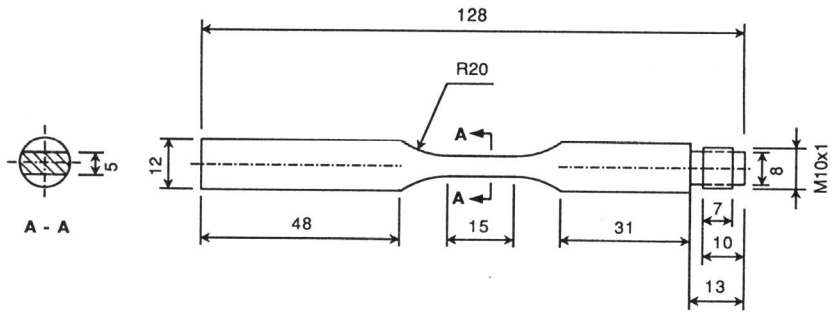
Typical geometry and dimensions of surface-crack tension specimen.
